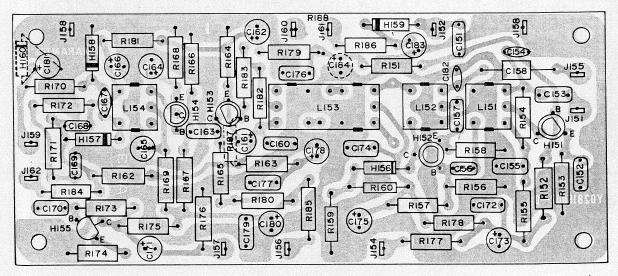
AM Tuner Unit Assembly P150 Component Locations
